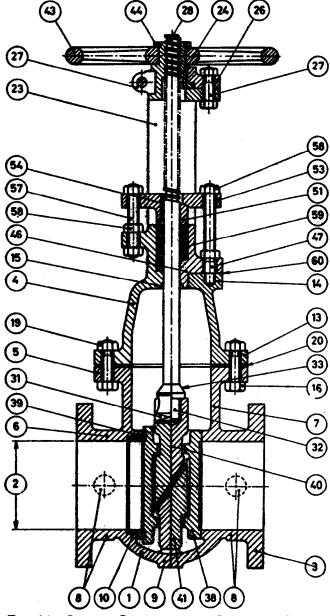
Outside Screw, Double Disk, Stem Rising Through Handwheel
